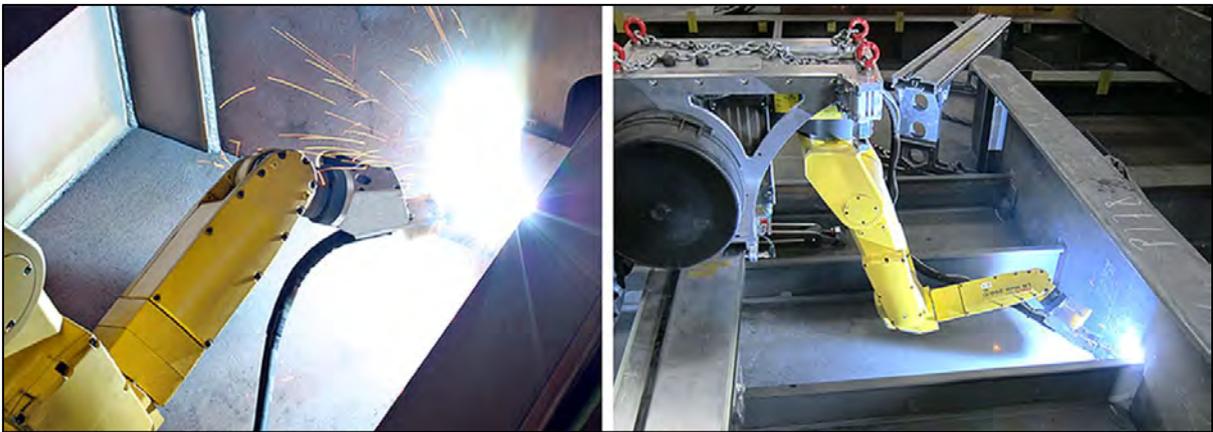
Robotic welding between webs, stiffeners and deck plate. The robot identifies the structure and welds automatically. (Source: Inrotech)
